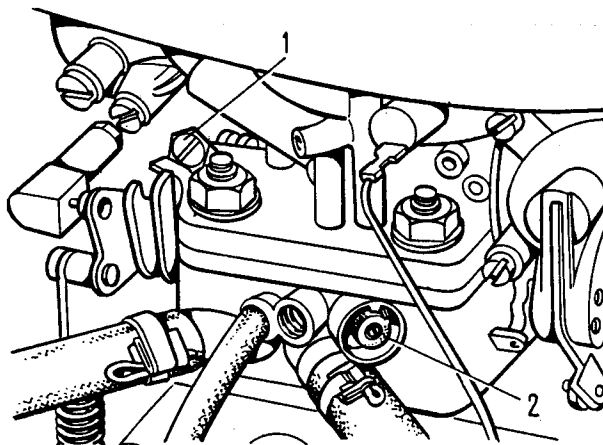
Idling System Adjusting Screws in Carburetors 2106-1107010:
